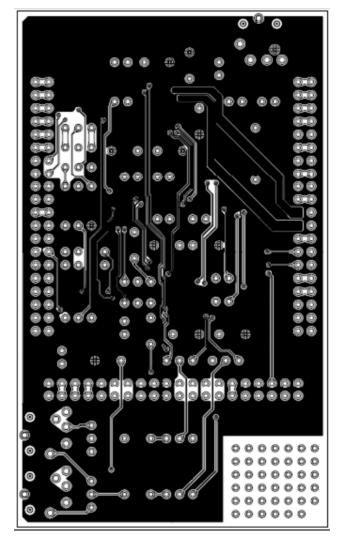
DEM-PCM1870RHF/1774RGP-A Board Layout—Solder Side
